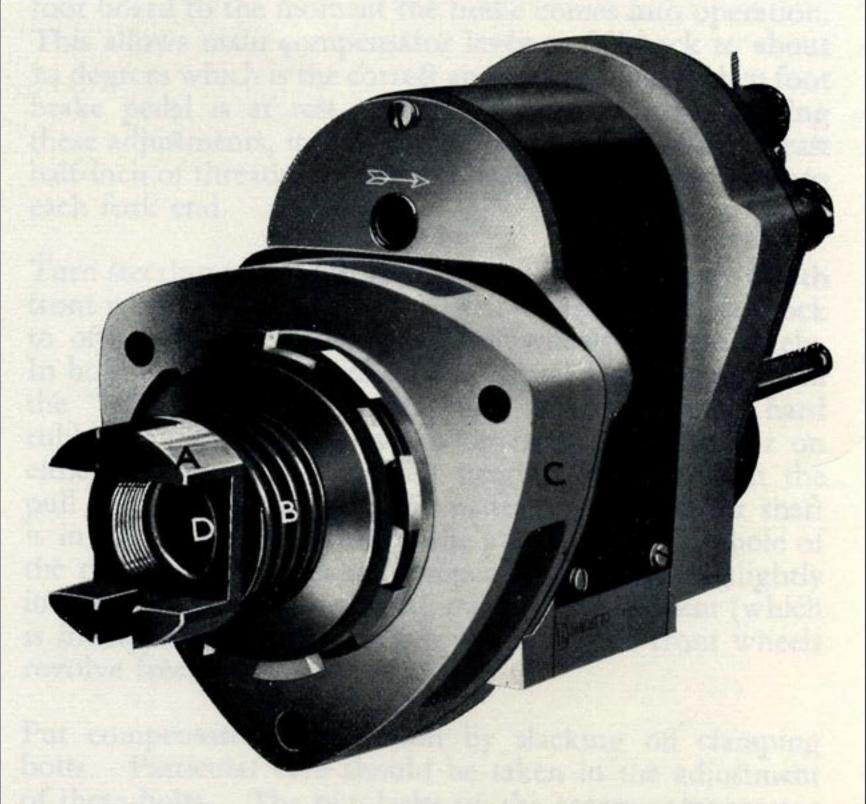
MAGNETO AS REMOVED FROM ENGINE.
